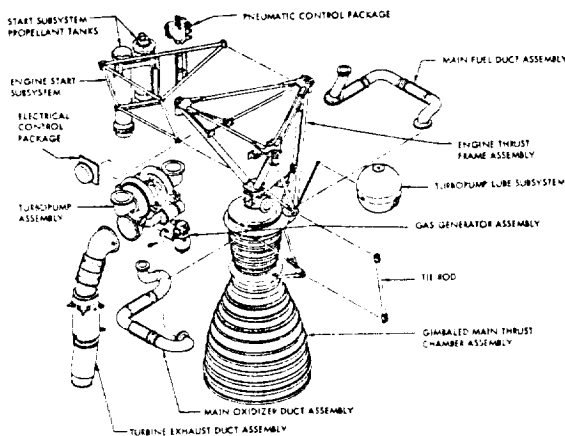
Major component and subsystem packages of turbopump-fed liquid propellant rocket engine.
